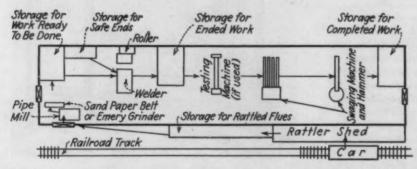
Arrangement of a flue welding shop using an electric welder. Two welders may be used by making another line of work down the other half of the same room.
